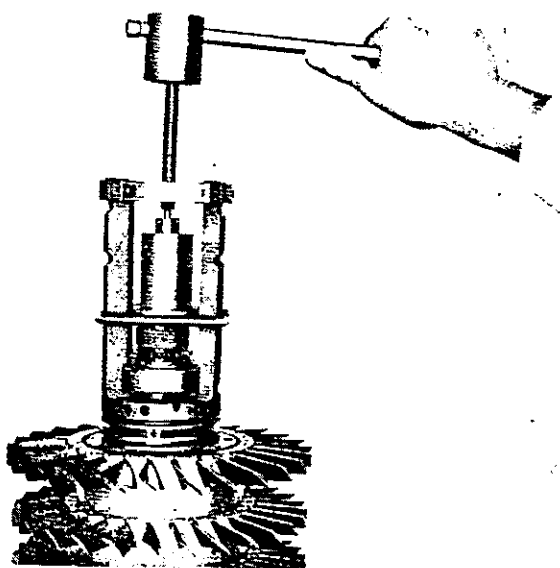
Removing Number One Main Bearing from Compressor Rotor Shaft
